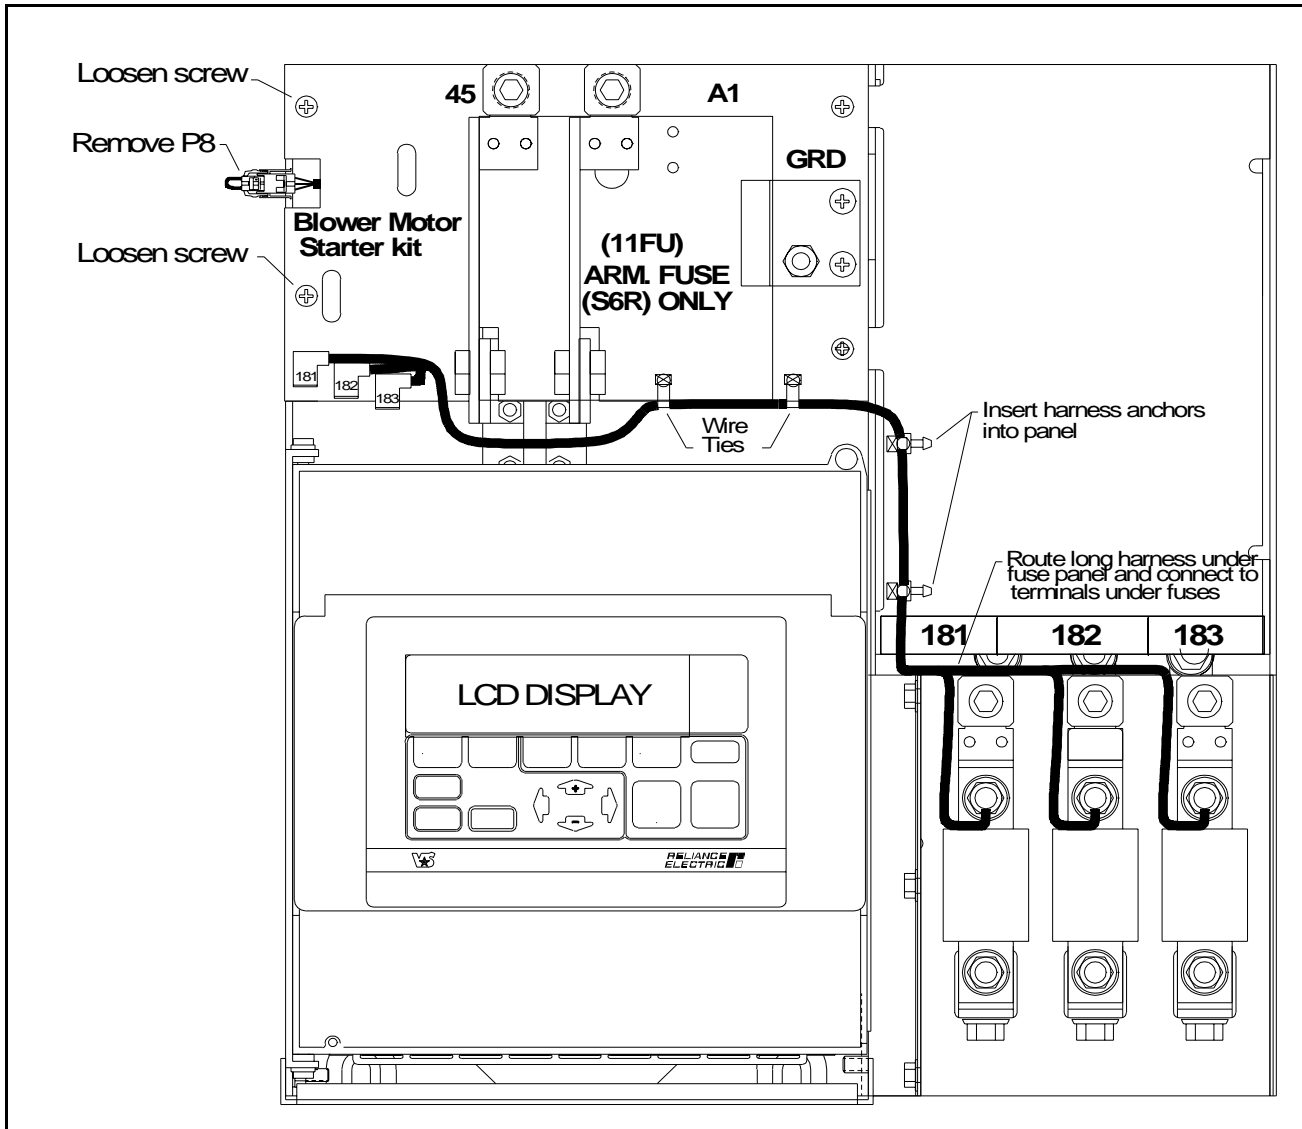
Mounting the Starter on the Drive Line-Fuse Panel (40 HP to 75 HP @ 230 VAC / 75 HP to 150 HP @ 460 VAC)
